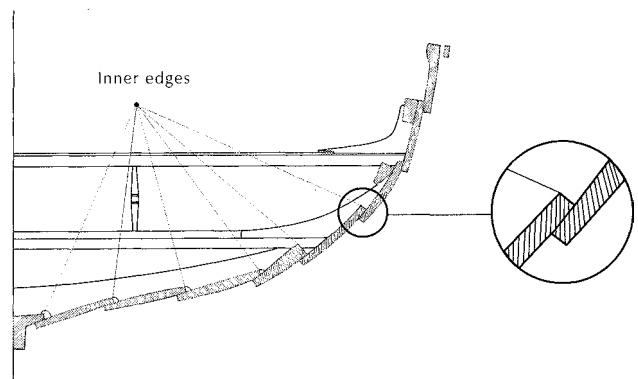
Definition of the inner edge of the strakes and the location of the rivets used in the various lines drawings.
